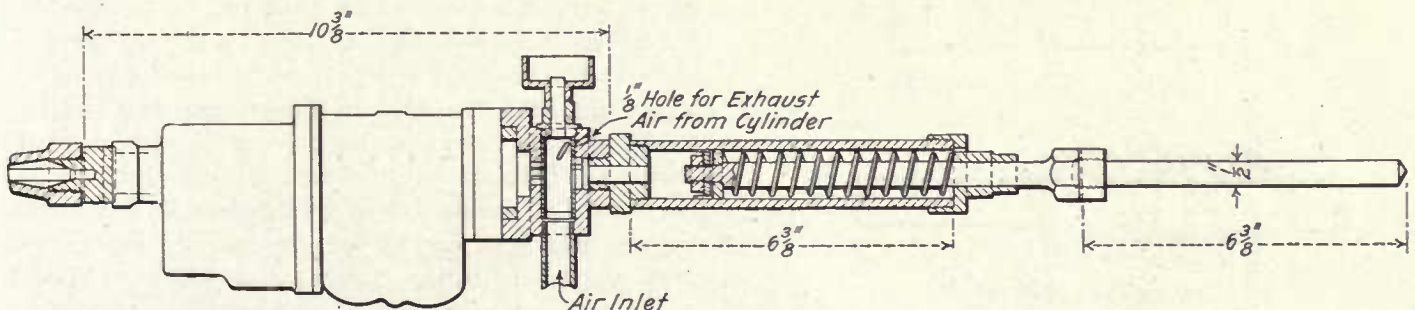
Pneumatic Attachment for Feeding Air Motor in Drilling Staybolts.
